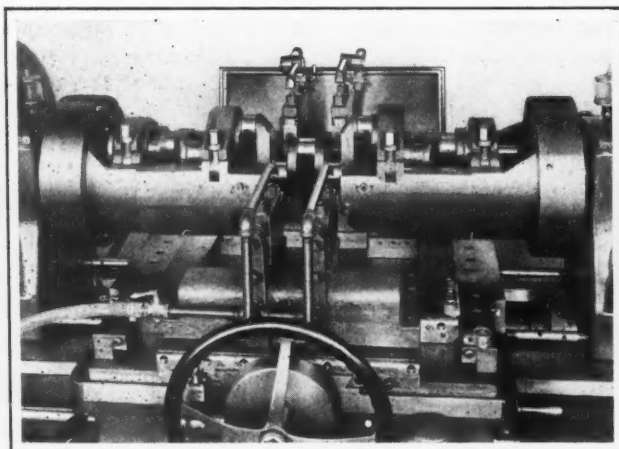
Duplex Lathe engaged in turning Pins Nos. 4 and 5 of a Crankshaft
